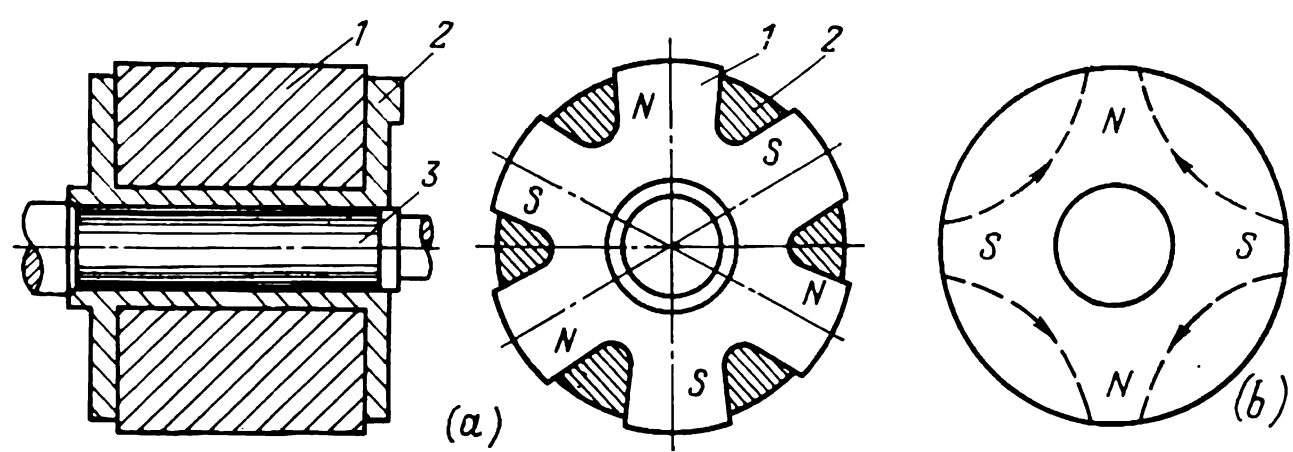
Permanent-magnet field structures for inductor-type machines: (a) star-type magnet without pole-pieces; (b) four-pole cylindrical magnet
